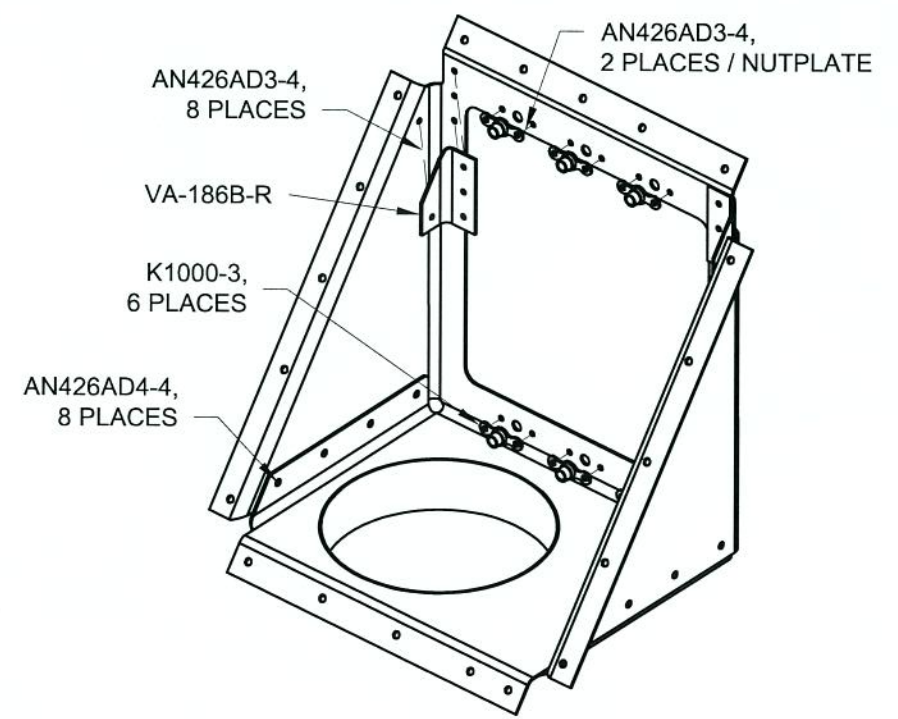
ASSEMBLING THE OIL COOLER BOX ASSEMBLY
